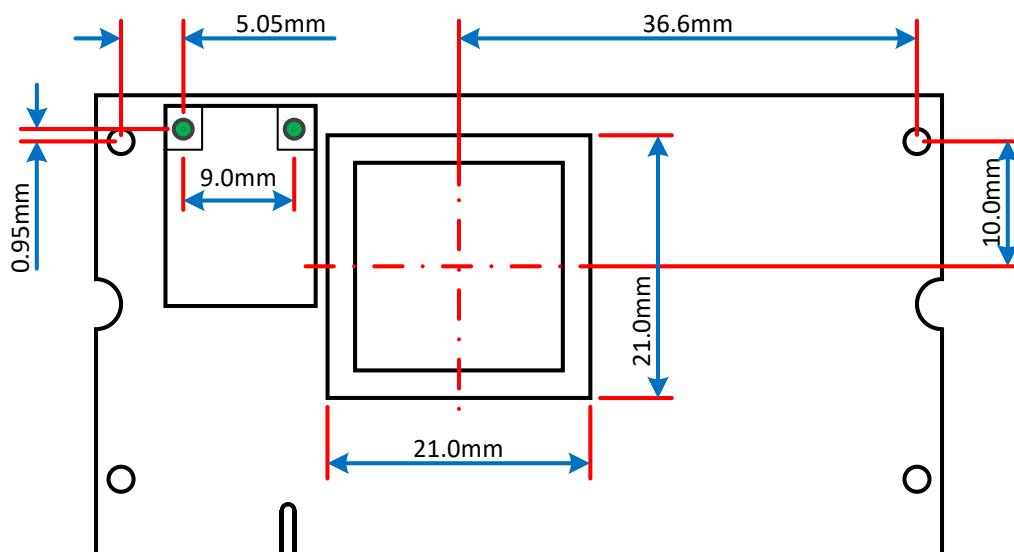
Mechanical position of SoC and Wi-Fi module (top view)
